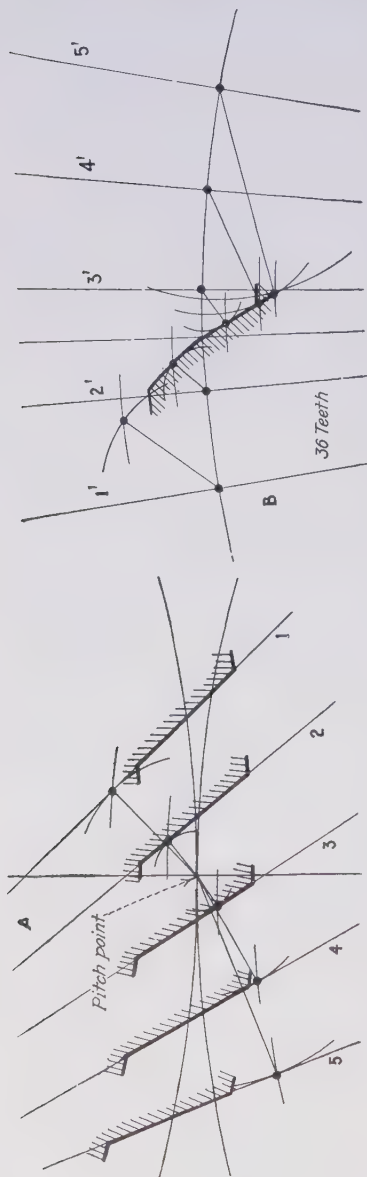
Construction of the profile of a conjugate gear tooth of a straight-line gear tooth.
